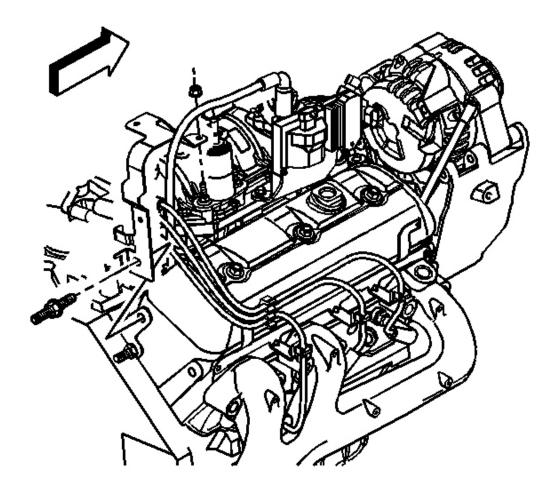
Engine Wiring Harness Rear Bracket Nut & Stud Holding Engine Wiring Harness Bracket
